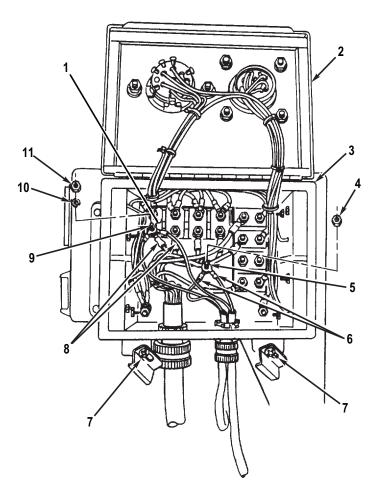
Front Dolly Internal Marker Clearance Light Cable Assembly Connection.
